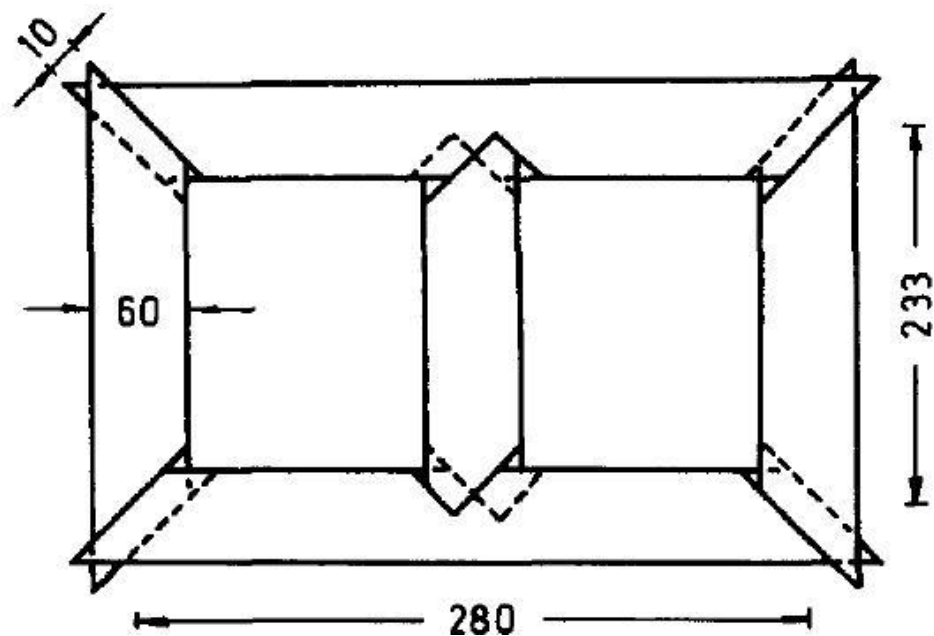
The 3-phase, 3-limb transformer core dimensions investigated in [53].
